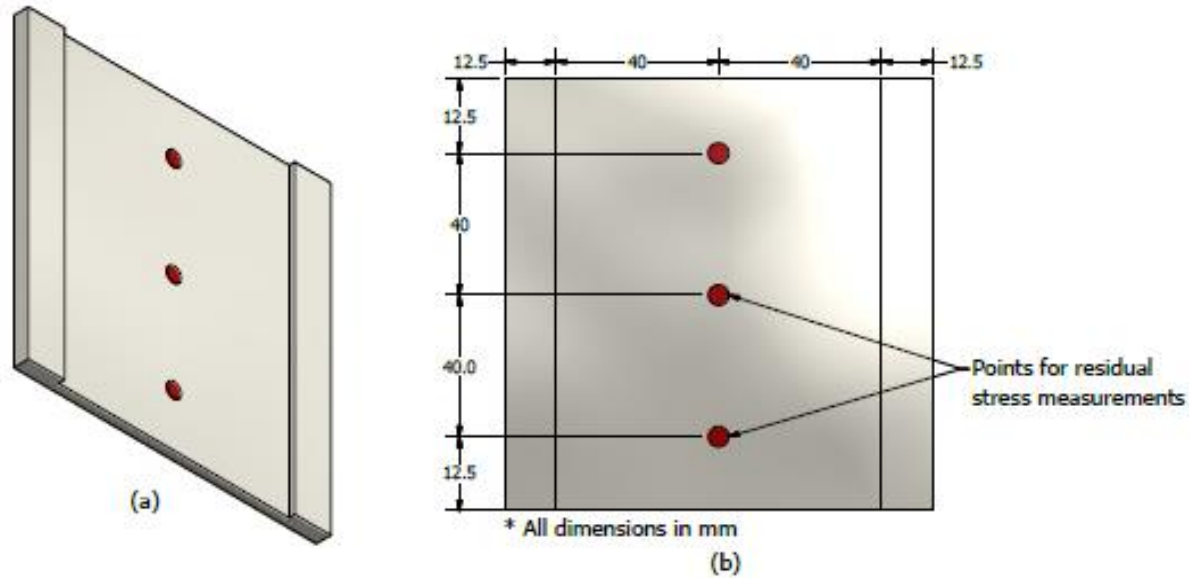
(a) 3D and (b) 2D representation of workpiece showing locations where XRD measurements were taken
